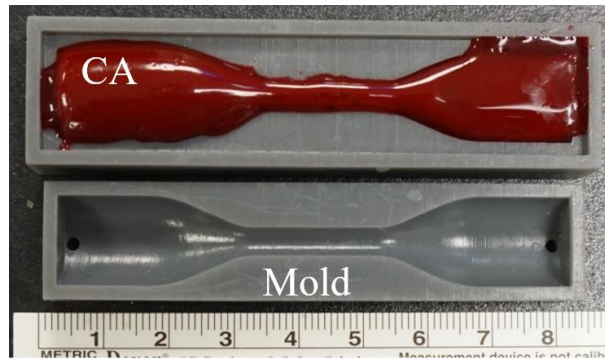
Forming the CA in the dogbone-shaped mold.
